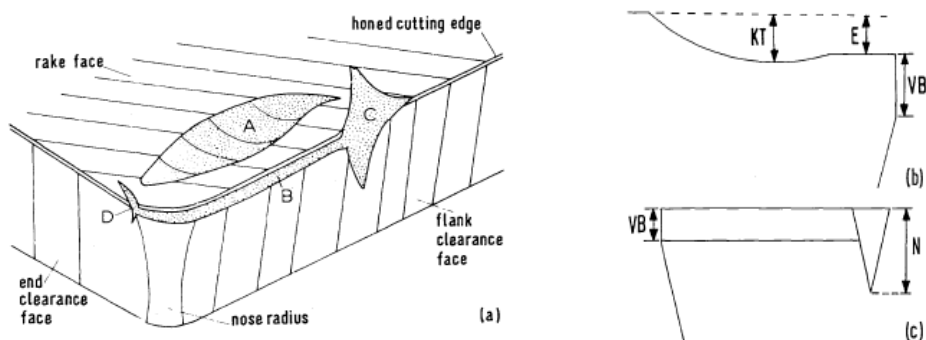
In figure (a): zone A crater wear on the rake face; zone B flank wear, zone C and D notch wear. (b) section parallel to the end clearance face, KT is the maximum crater depth, E is the edge depression, VB flank wear land; (c) view of flank clearance face with N notch depth flank face.
